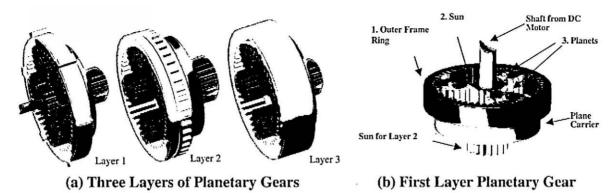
Planetary gear transmission assembly; (a) Three layers of planetary gears; (b) First layer planetary gear.
